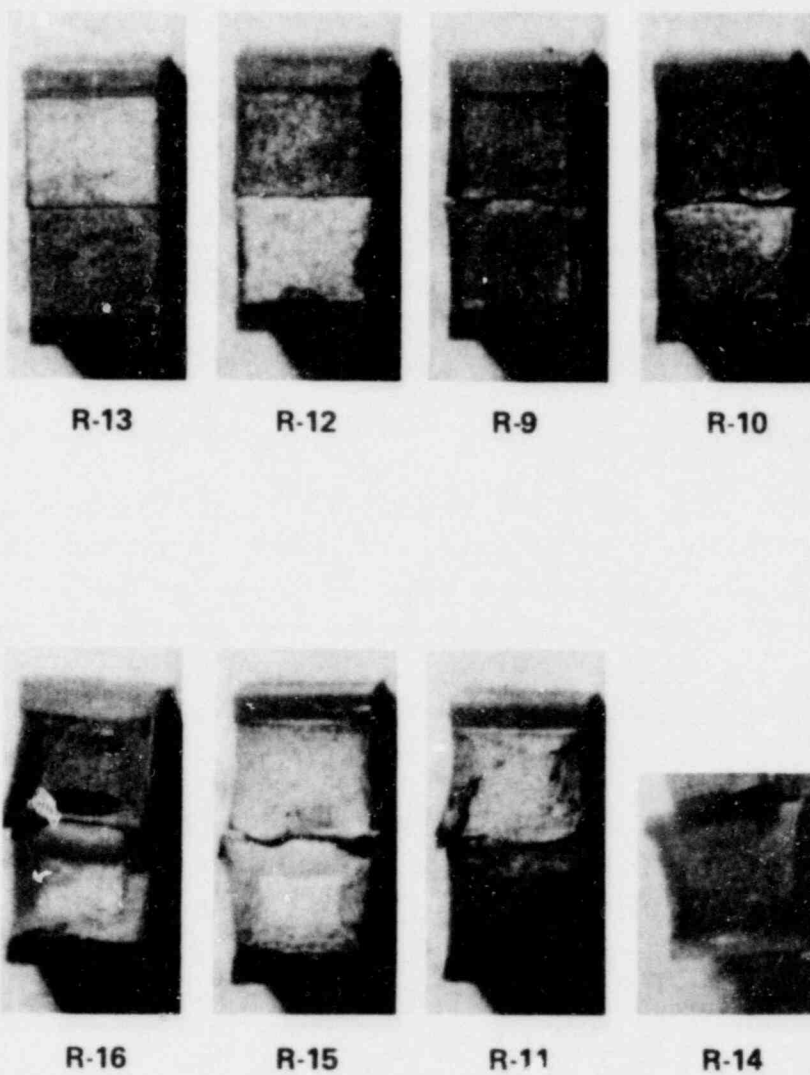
Charpy Impact Specimen Fracture Surfaces for Kewaunee ASTM Correlation Monitor Material
